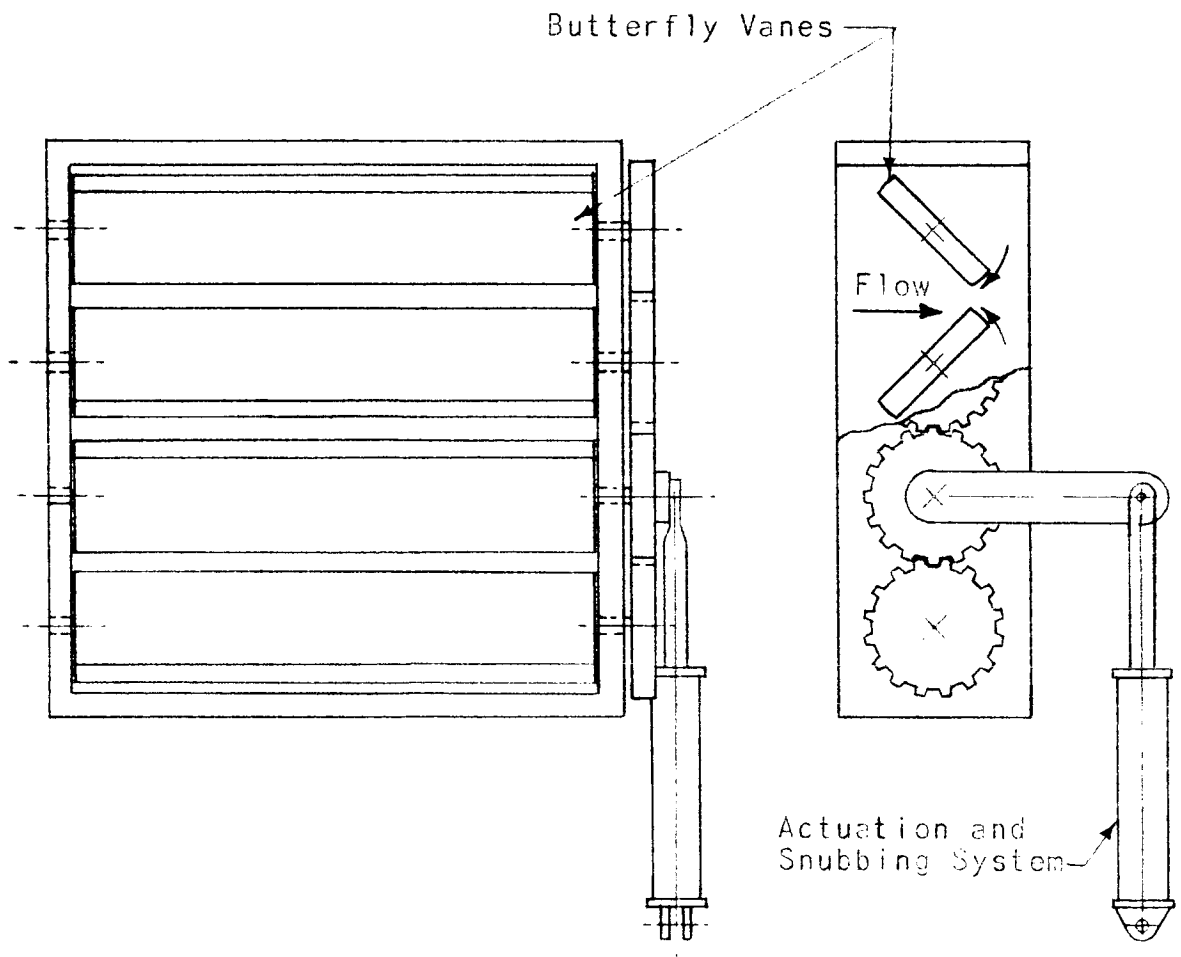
SKETCH OF MULTIPLE BUTTERFLY VALVE CONCEPT
